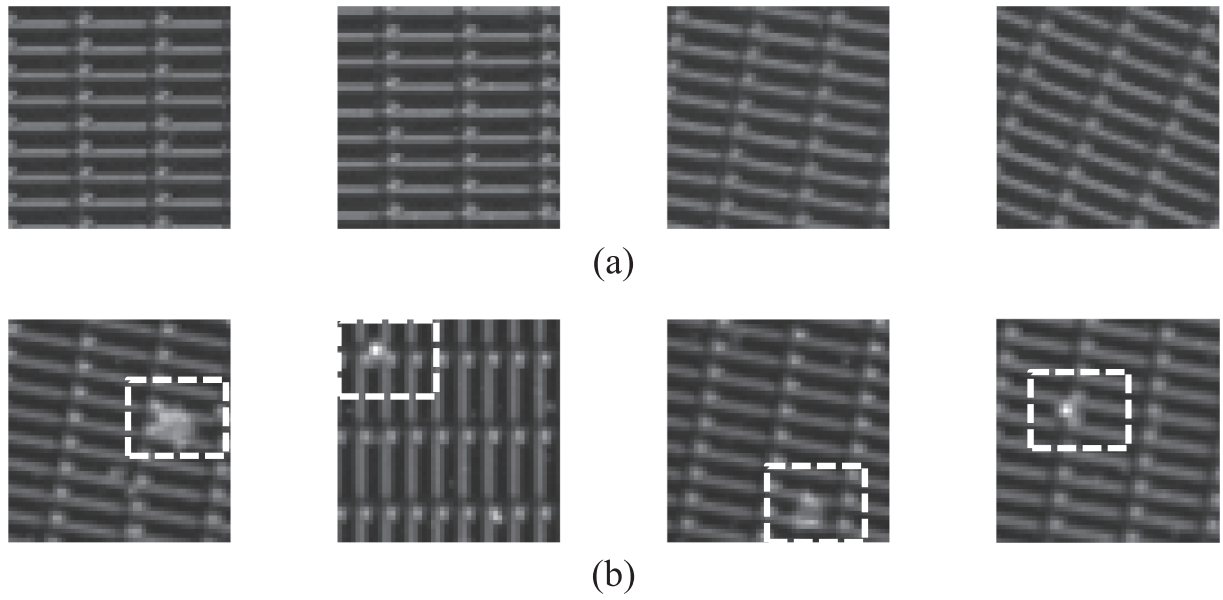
Liquid Crystal Display (LCD) test examples: (a) 4 defect-free panel surfaces; (b) defective samples (marked by dot-frames).
